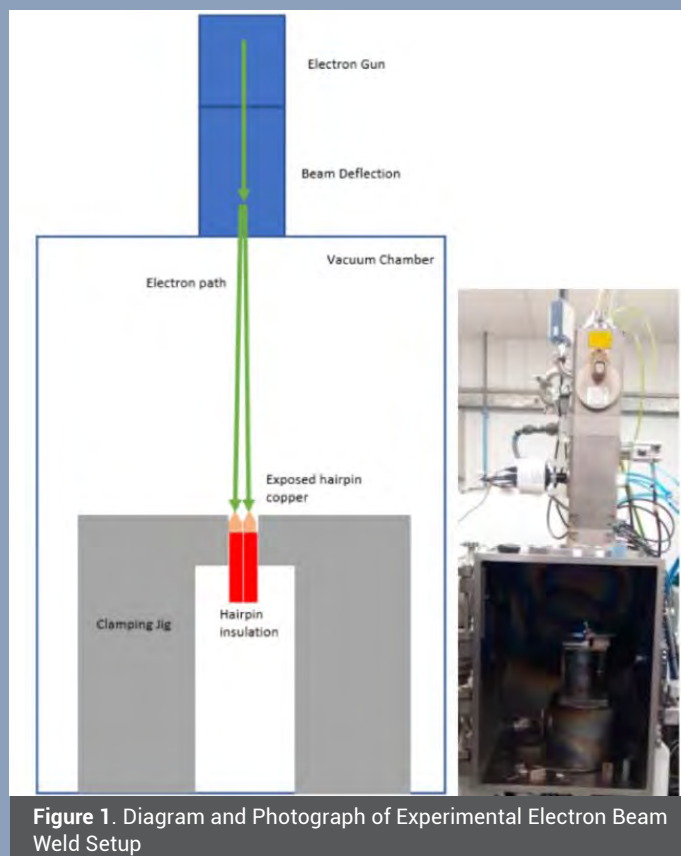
Diagram and Photograph of Experimental Electron Beam Weld Setup
